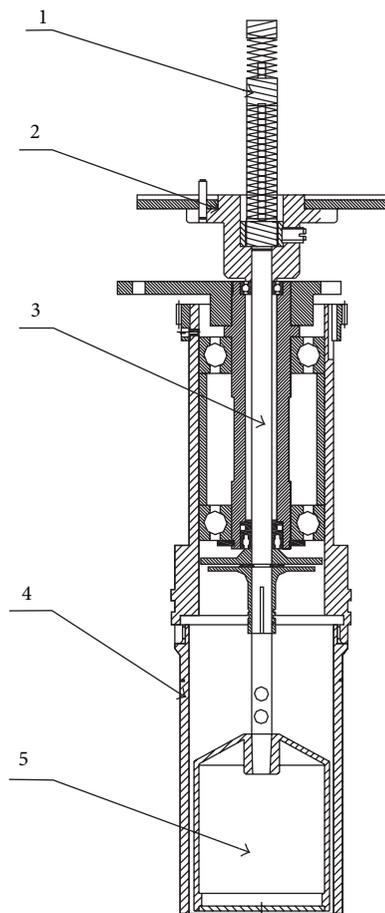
The geometry of viscometer spinning rod. Note: 1: spring assembly; 2: dial components; 3: inner tank shaft; 4: outer cylinder; 5: inner cylinder.
